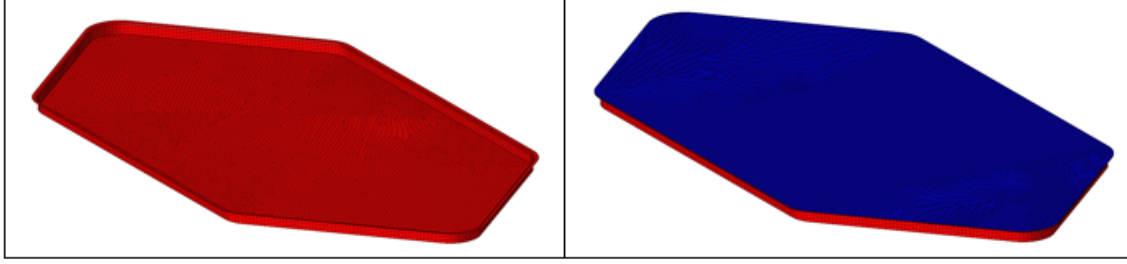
Forming tool for the superplastic forming simulation (left), forming simulation with the magnesium sheet (right)
